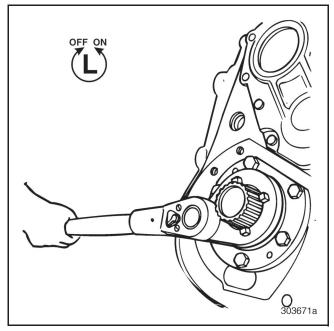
Removing Main-Drive Shaft Bearing Locknut
